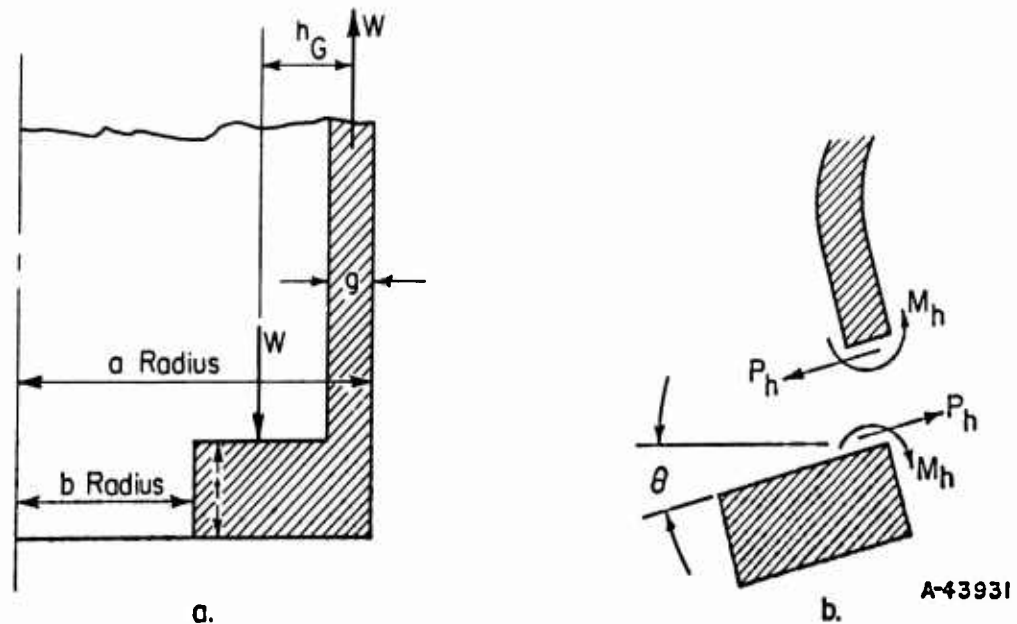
INWARDLY PROJECTING FLANGED CYLINDER NOMENCLATURE
